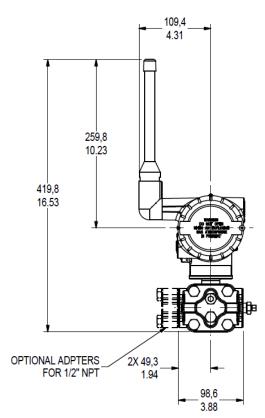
Dual Head Gauge, , typical mounting dimensions for STGW740, STGW770 (4 dBi antenna shown, rear view)
